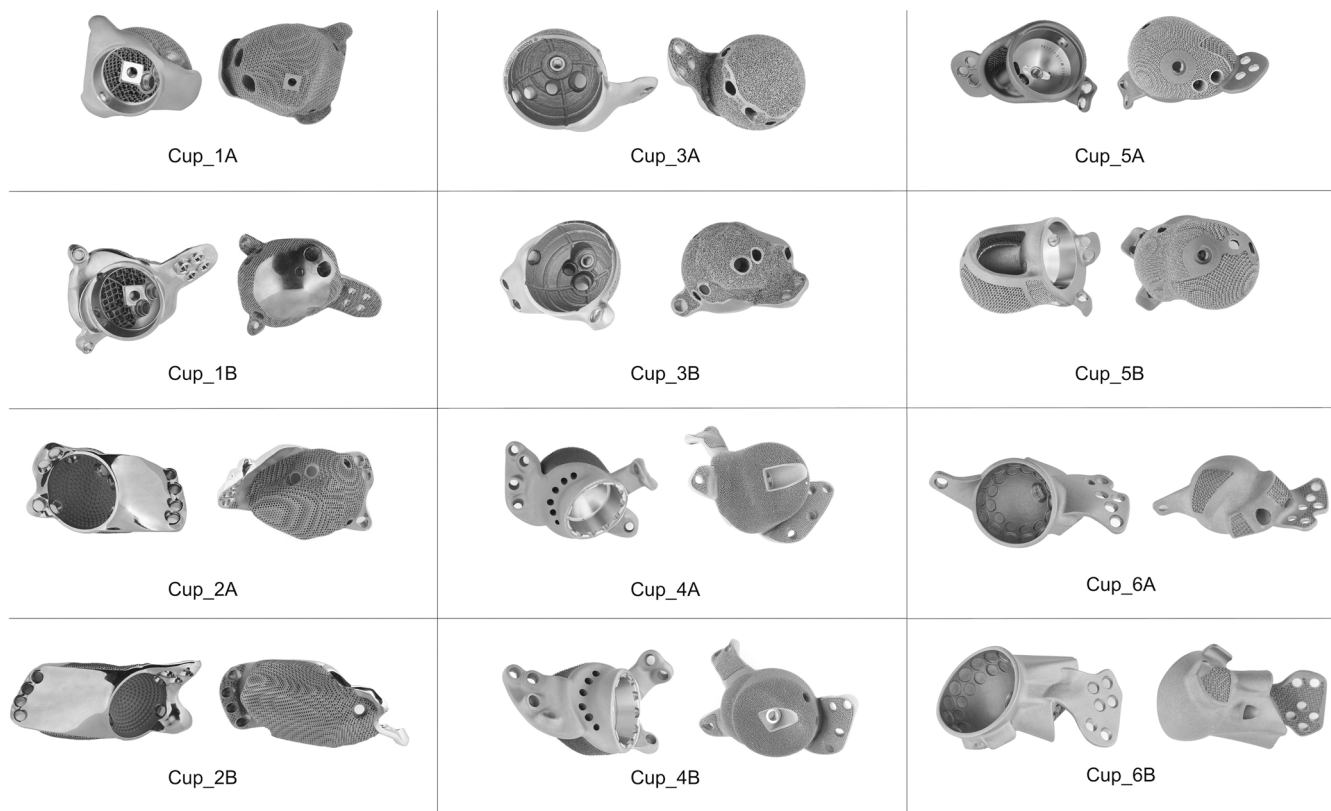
Macroscopic images of the 12 cups examined in this study, which were 3D-printed by six manufacturers. Two views of the front and back of each cup are presented.
